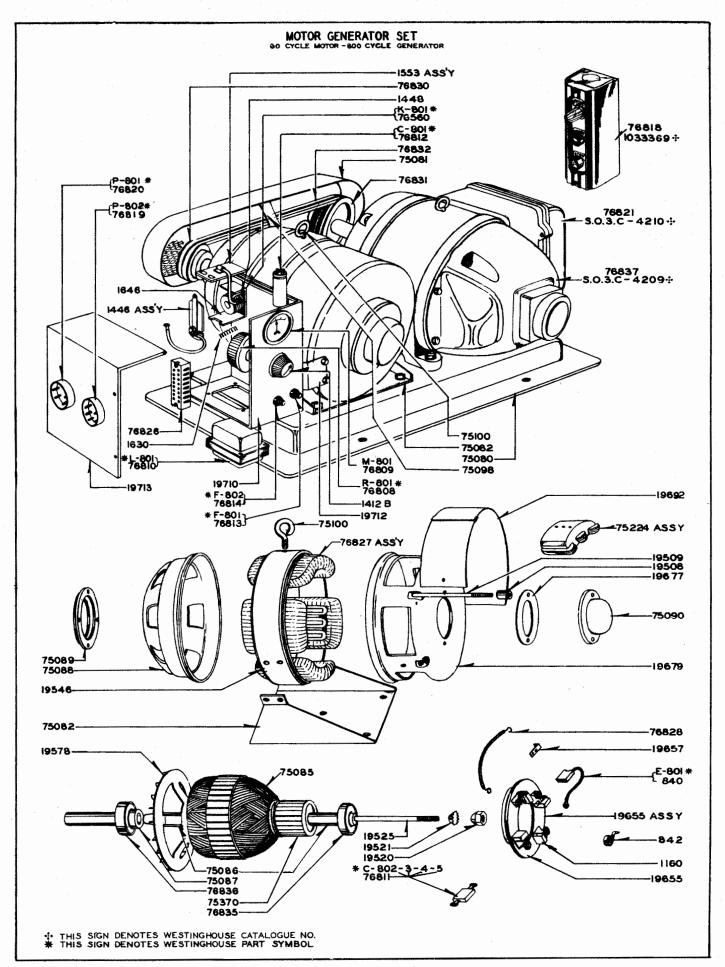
Motor Generator Parts for Motor Generator Set Type CDO-21648.
